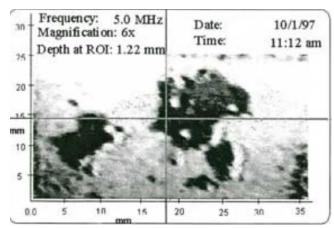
Ultrasonic reading from corroded aluminium plate [12]
